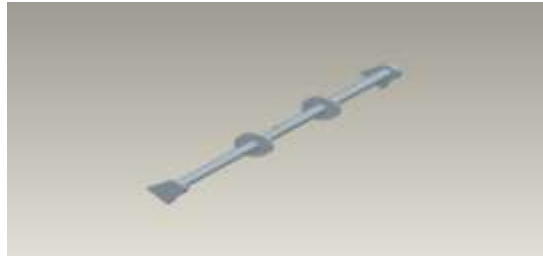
Pro-E model of the rotor shaft with crack on the shaft
